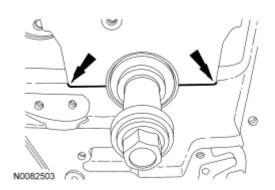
Locating Main Bearing Beam Side Fit Surfaces
